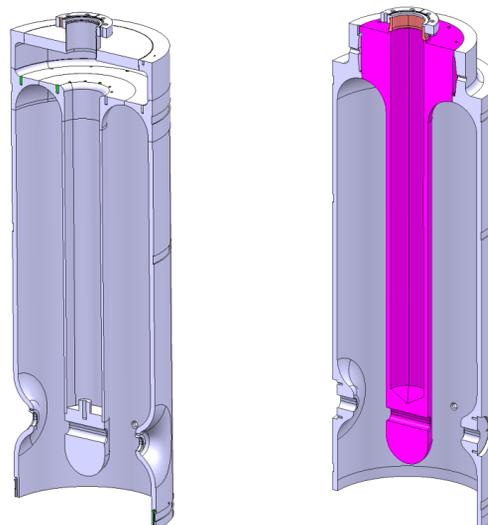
HIE-ISOLDE high-beta copper substrates: left) rolled and welded prototype; right) bulk machined prototype (inner conductor shown in magenta).
